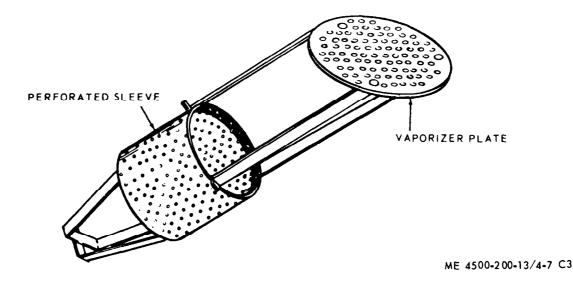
Burner (4540-266-6835) (Model 447-2EX).
